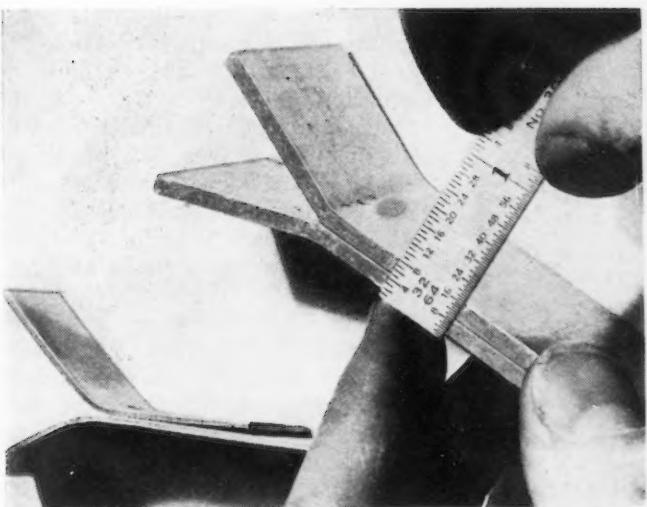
Range of capacity of the "Progressive" aluminum welding machine is indicated by these two samples welded by the same machine within a few moments of each other: Two pieces of $1/8$ in., and two sections of 0.032 in., 24 S.T. aluminum alloy.
